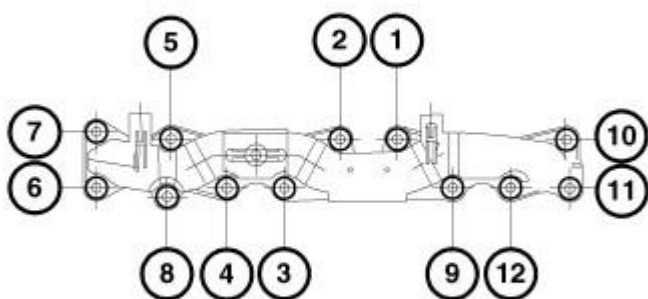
EXHAUST MANIFOLD TORQUE SEQUENCE
